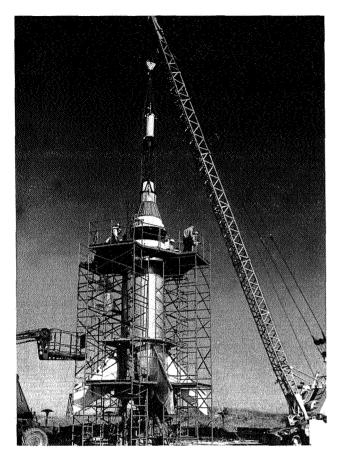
Technicians attach escape tower to prototype Mercury capsule prior to assembly with Little Joe launcher, August 20, 1959.
